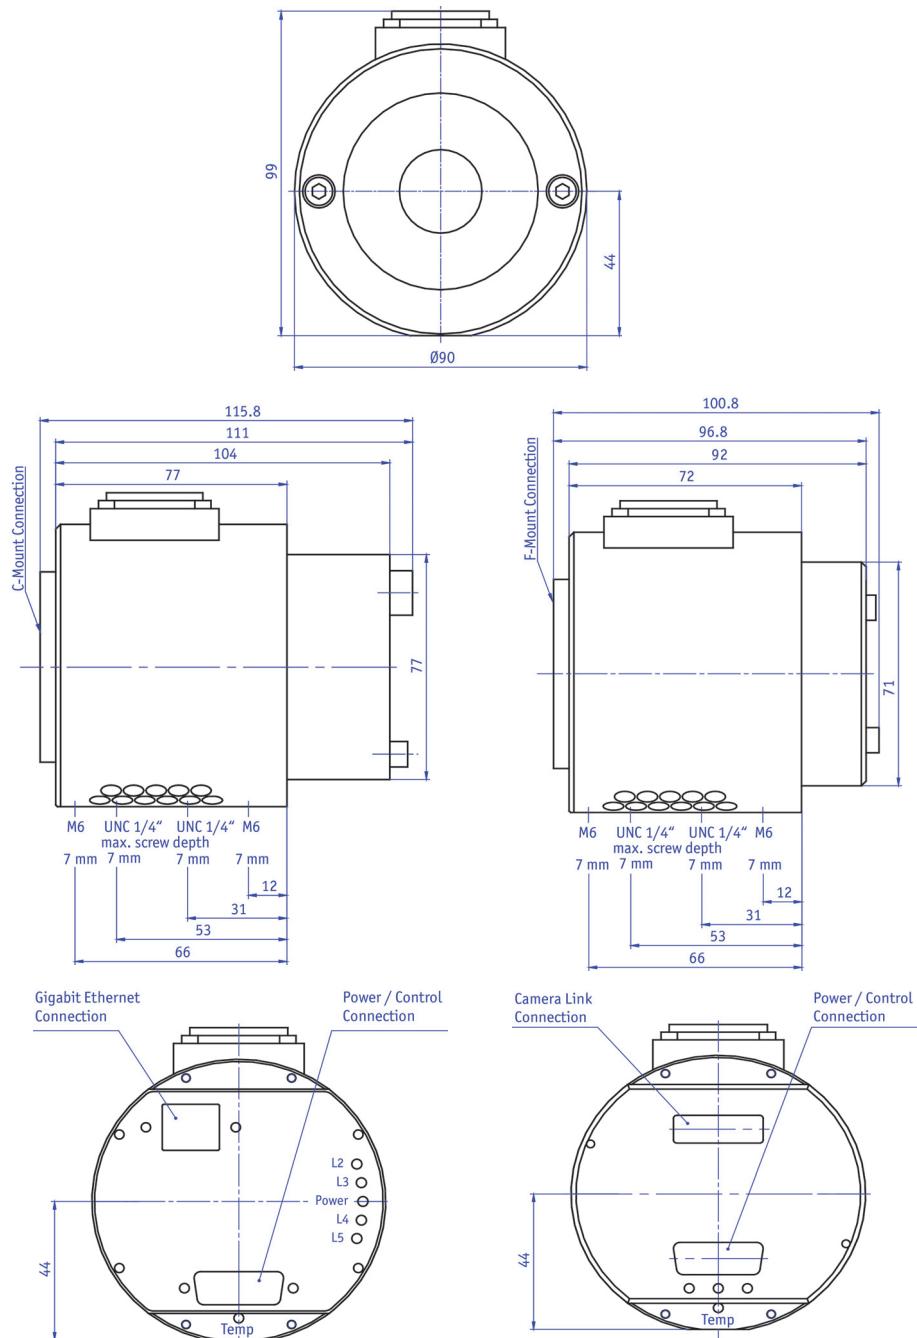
Camera dimensions: Goldeye P-032 SWIR Cool / Goldeye CL-032 SWIR Cool
